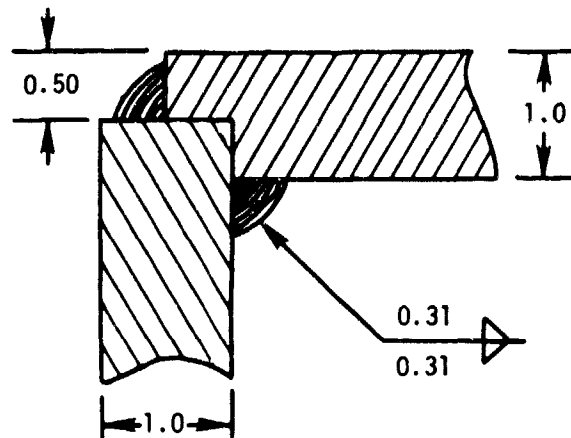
Weld joint design for corner weldments used in ballistic shock tests.
